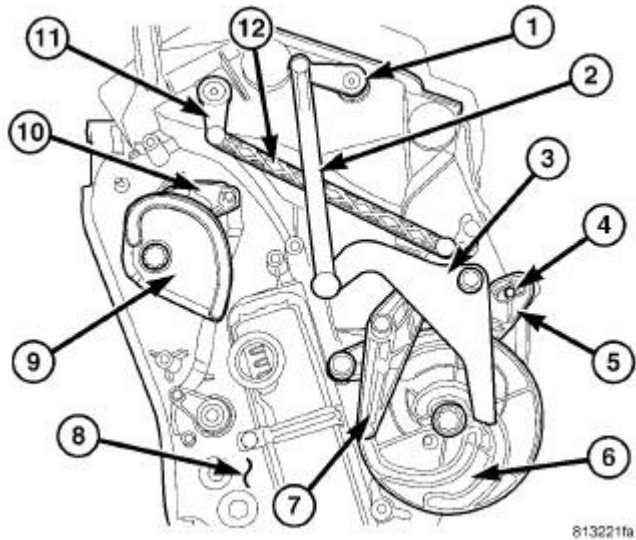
Air Housing-Actuator Linkages-LH Removal & Installation
